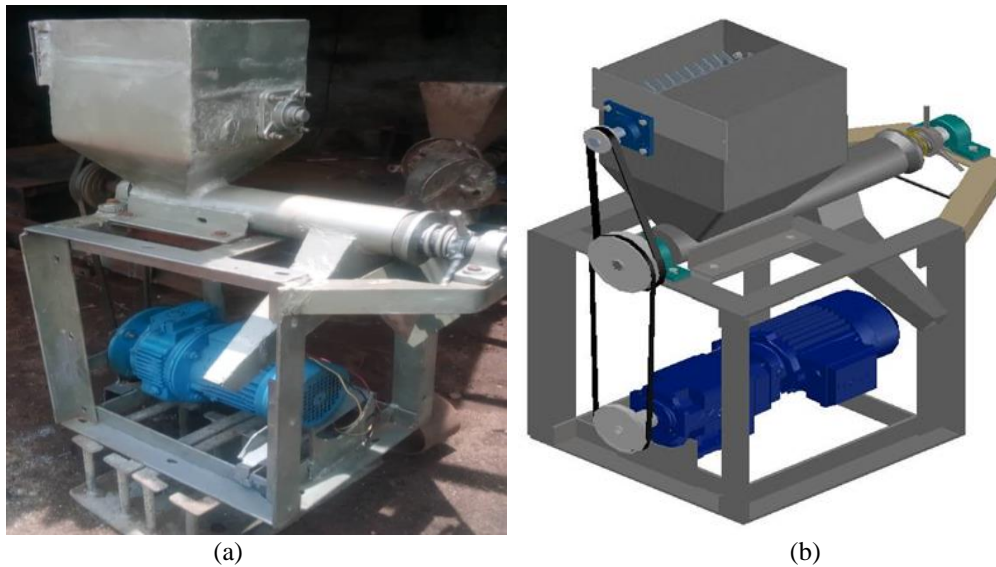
Photograph and, (b) 3D photo-rendering of the fruit juice Extraction Machine
